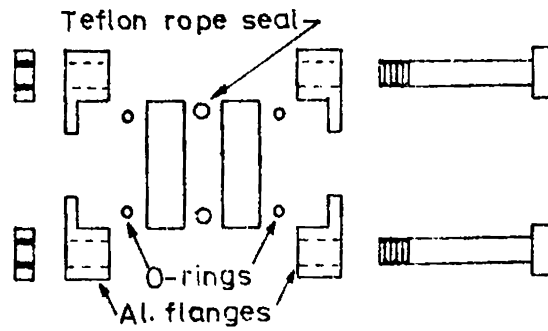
DYE Q-SWITCH - EXPLODED VIEW
